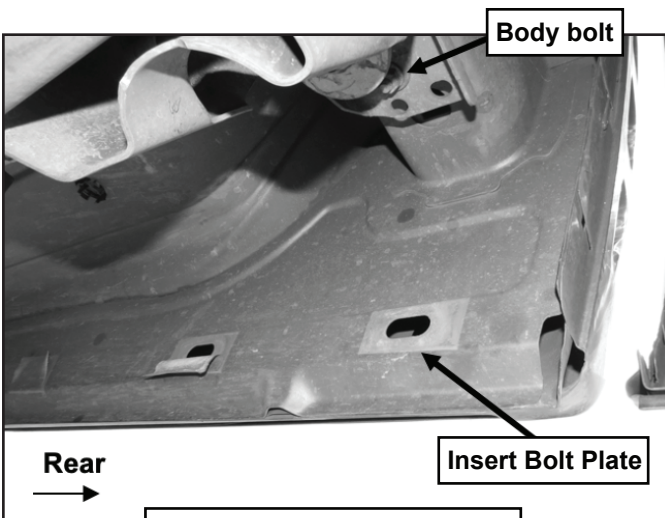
Attach the Passenger/Right Center Mounting Bracket to the center location
